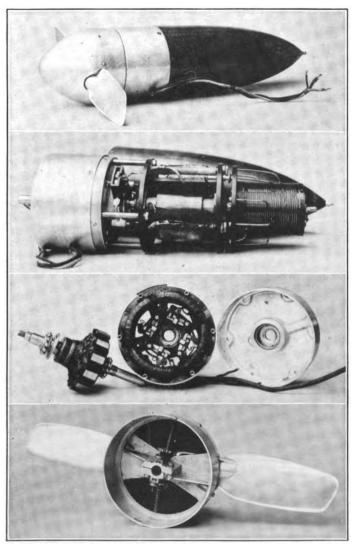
Top to Bottom: Type SCR-73 Set Assembled. Casing Removed Showing Radio Apparatus. Rotor and Stator of Alternator. Airfan and Governor.
